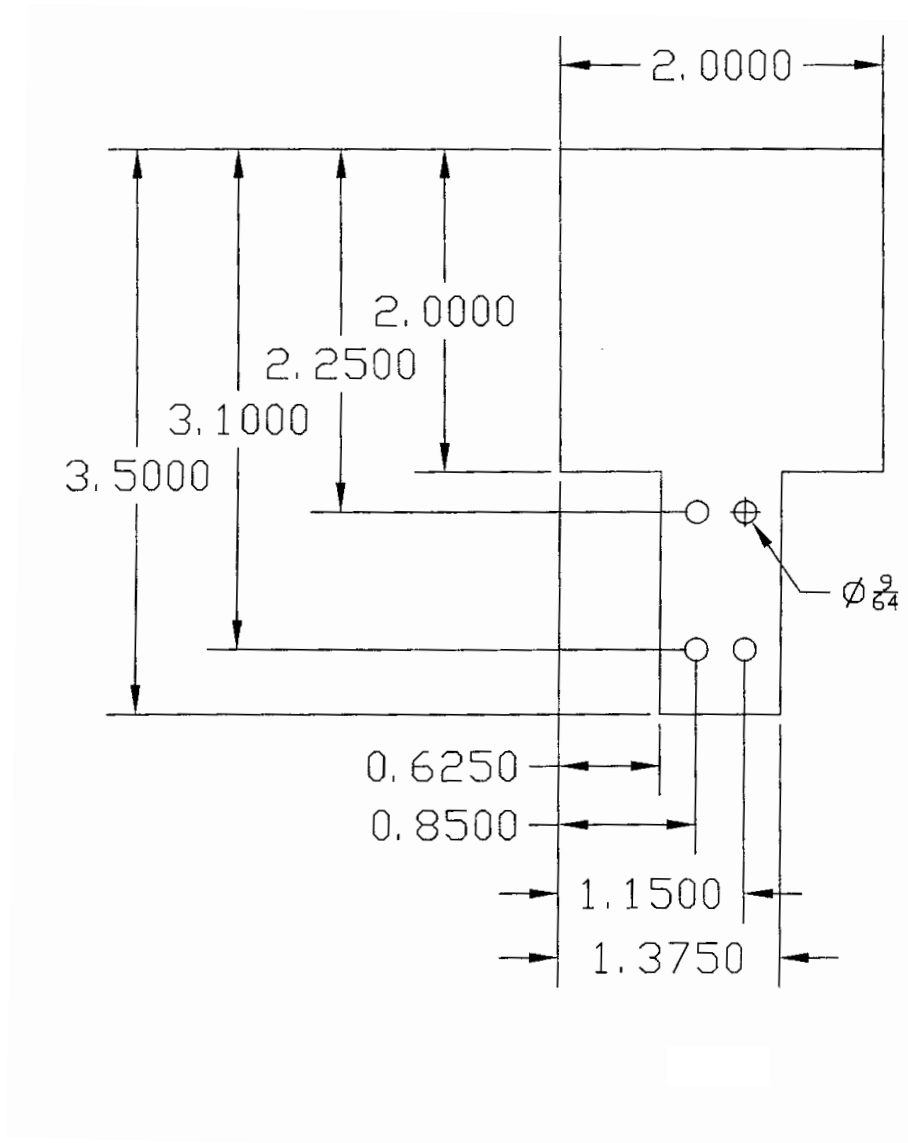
Front view of CAD details of the knee plates. They are machined from 0.25 inch thick aluminum plate.
